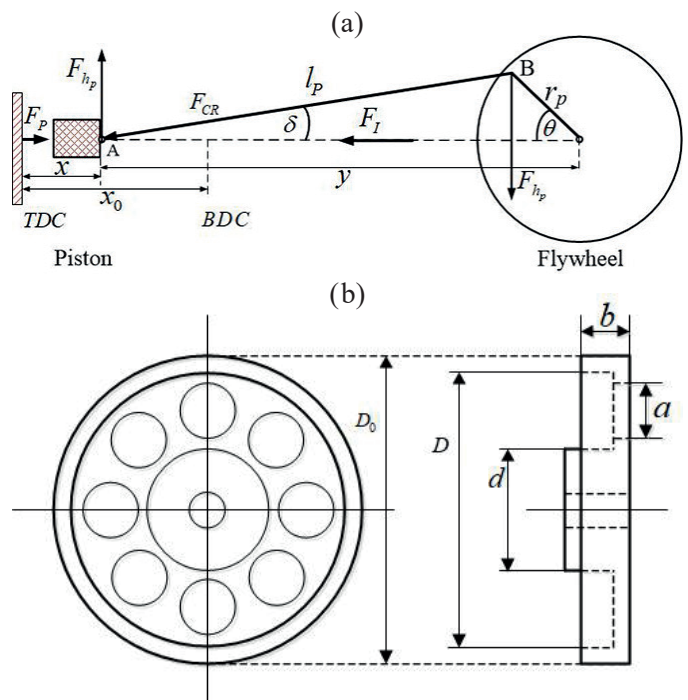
Detailed design of each flywheel and connecting rod (a) and top-view and side-view of flywheel (b)
